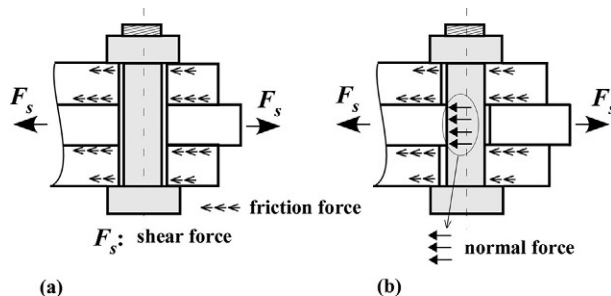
(A) Friction type joint and (B) bearing type joint.
